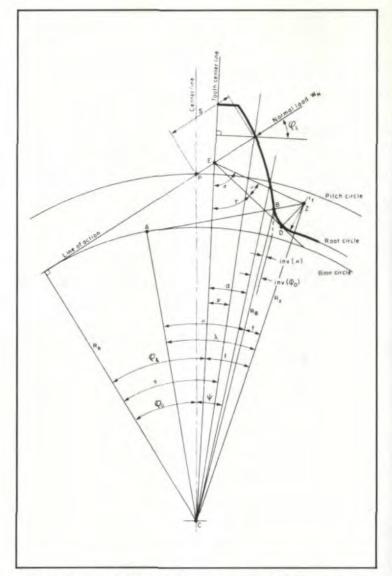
Geometrical relations in an involute spur gear tooth when the center of the root fillet radius is above the base circle
